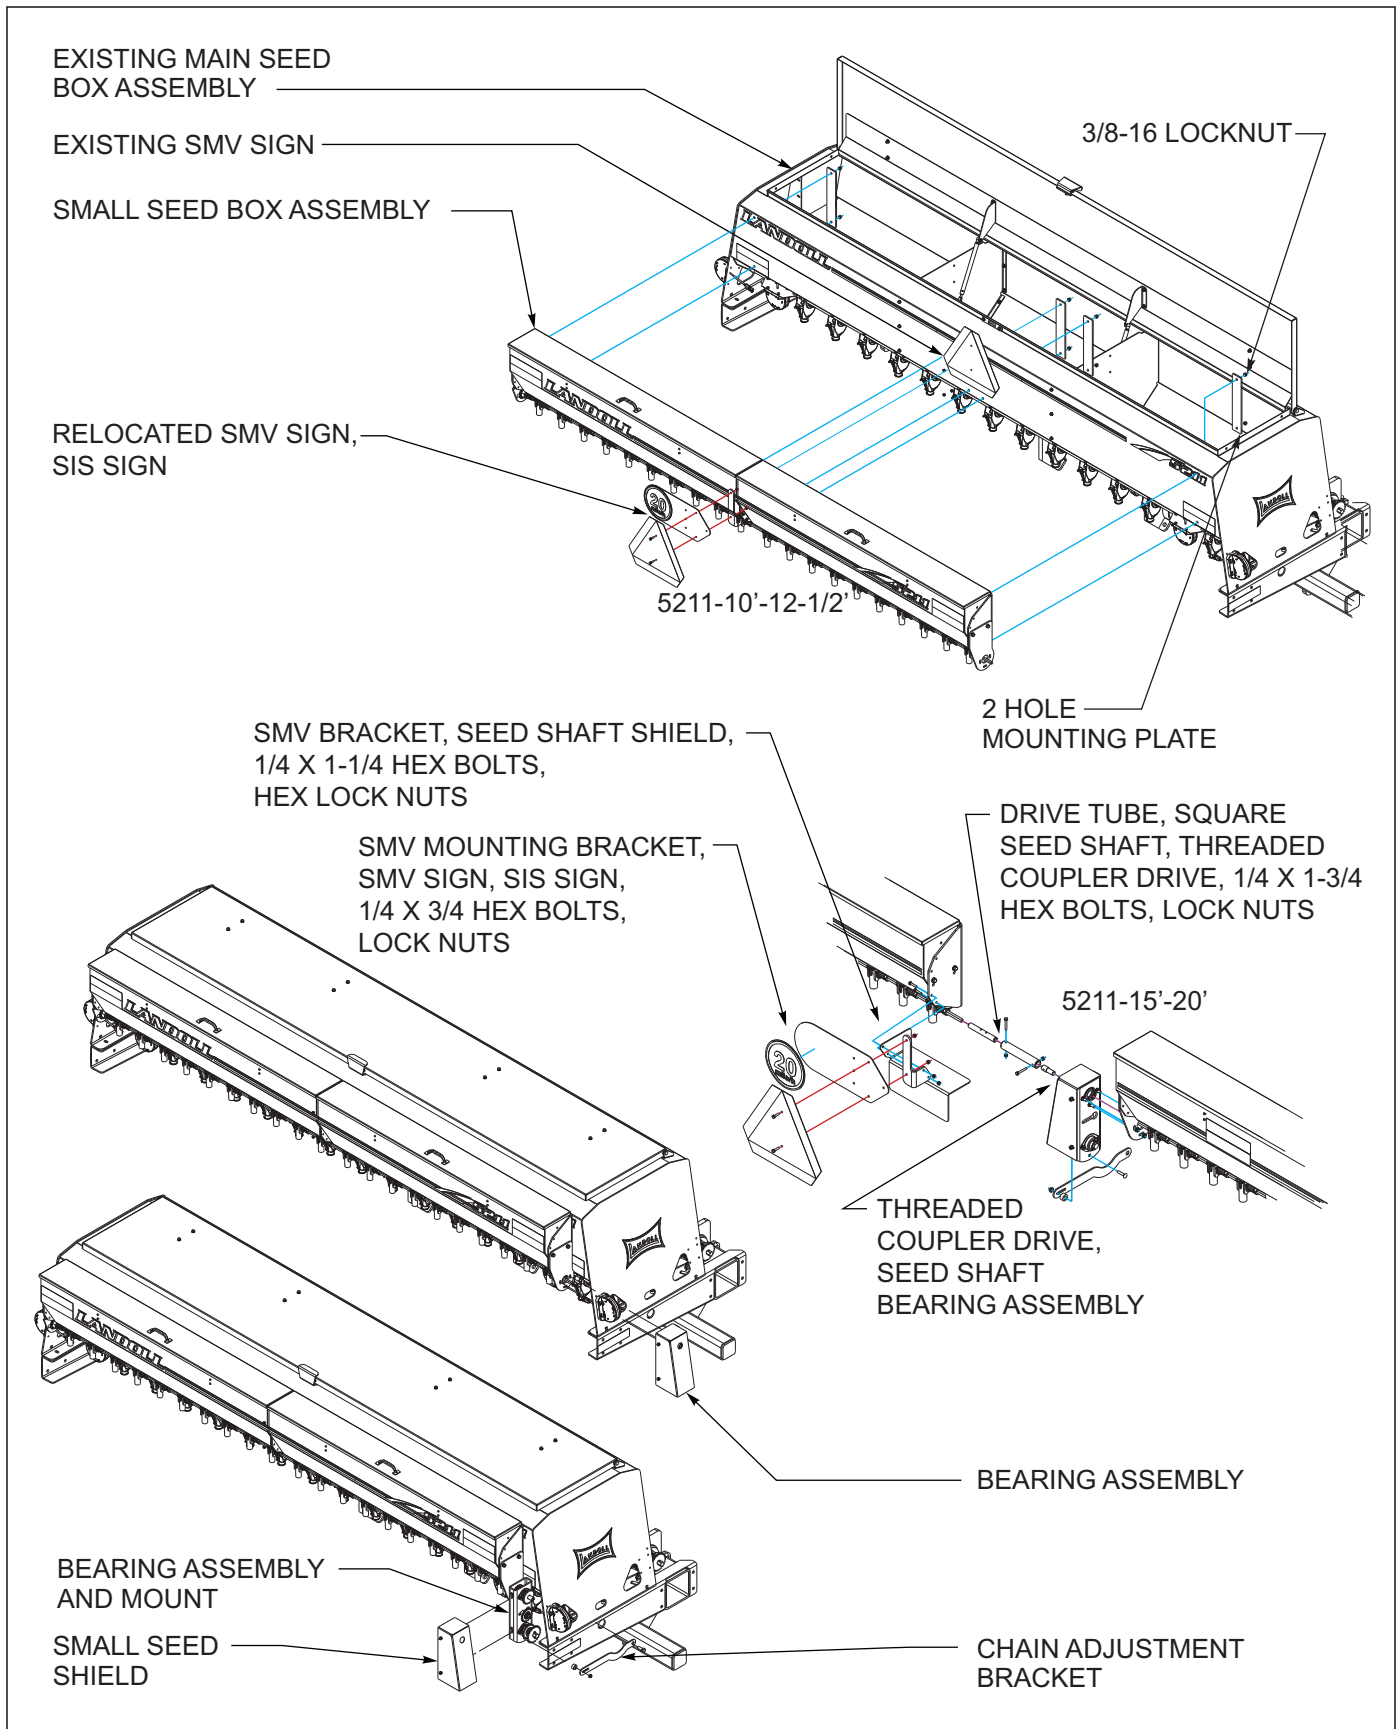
Small Seed Assembly Overview (12-1/2' Drill Shown)
